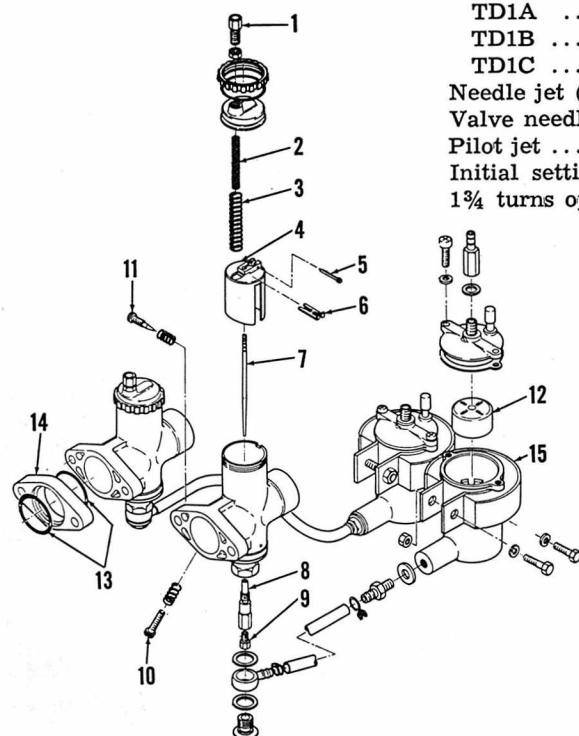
Exploded view of Mikuni VM 276 carburetors and float bowls.
